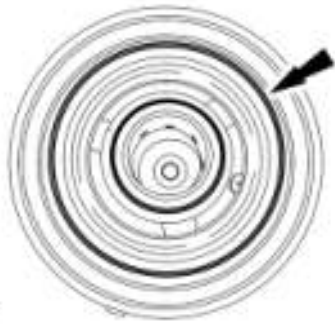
Removing Retaining Ring Using Special Tool (307-525)
